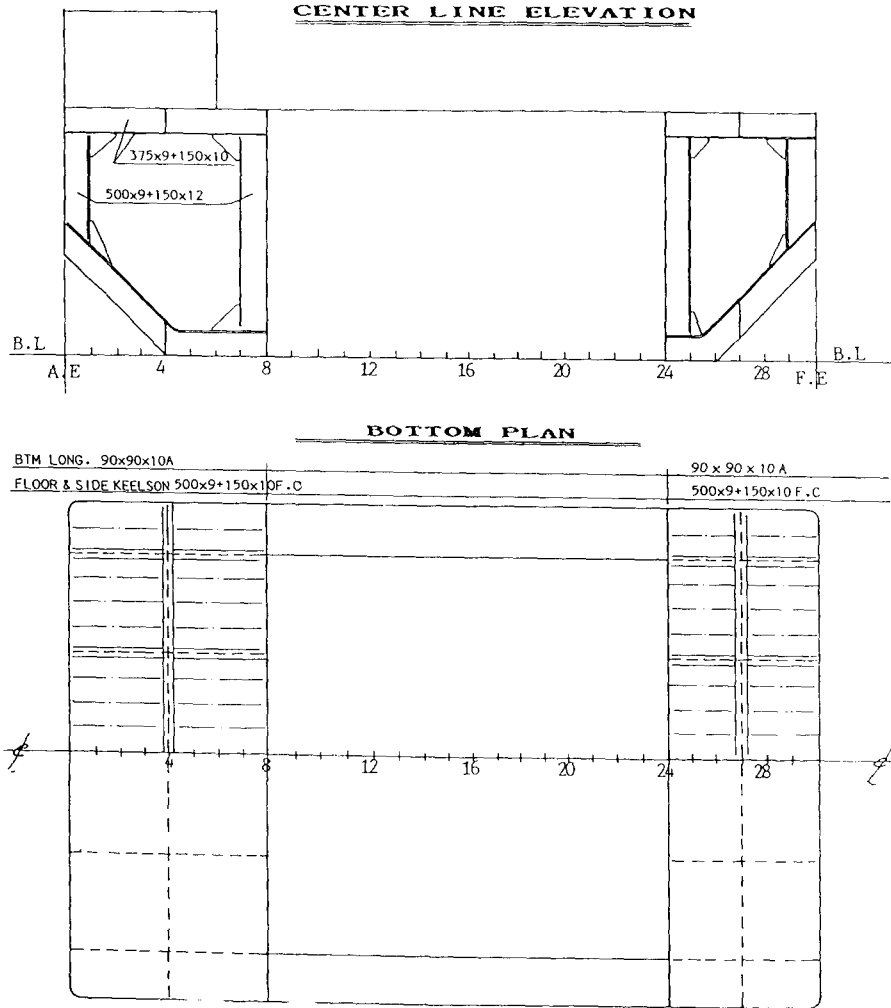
Center line Elevation and Bottom plan of the Single Fish pool type.
